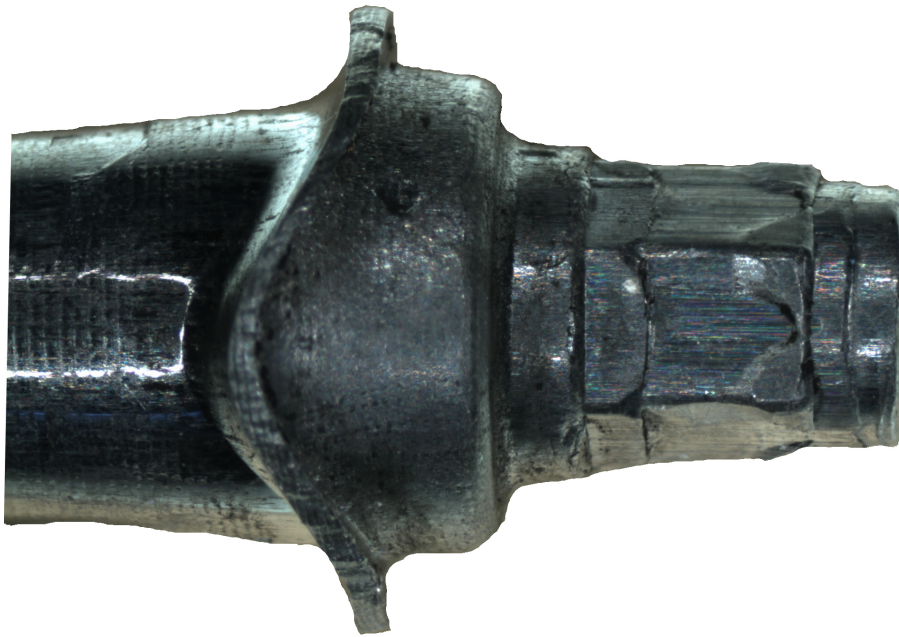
Aluminium component formed after polishing of the upper forming die. The polishing removed much of the side cut in the conical die.
